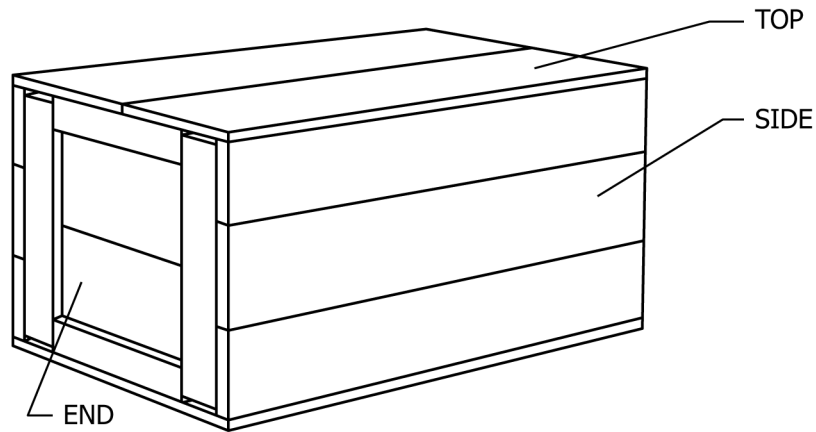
Style 2 Box (Full Cleated Ends, Butt Joints)
